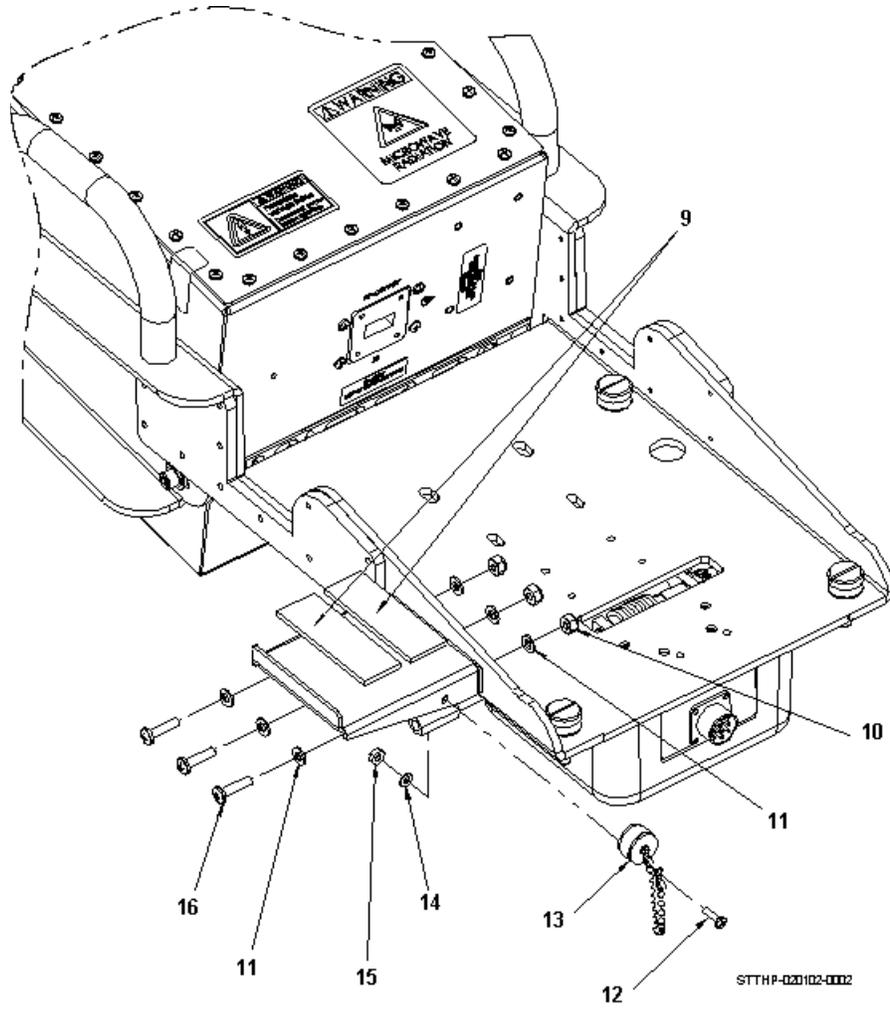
Feed Assembly, KU Band - Group 020102 (Sheet 2 of 6).
